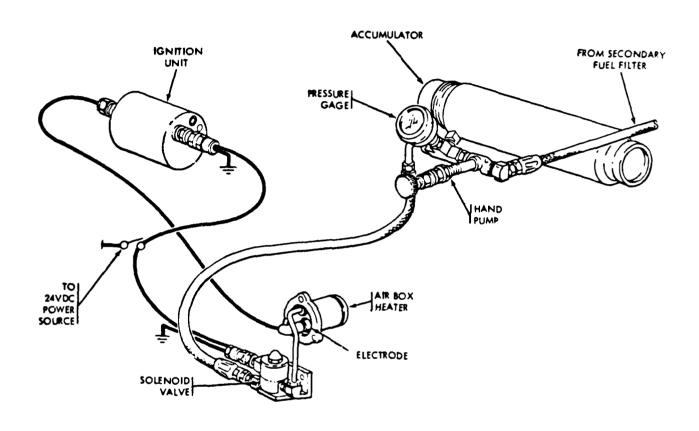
, THE ACCUMULATOR-TYPE FLAME HEATER FUEL SYSTEM FOR THE DDA 6V-53 AND 6V-53T ENGINES Source: TM9-2815-205-34
